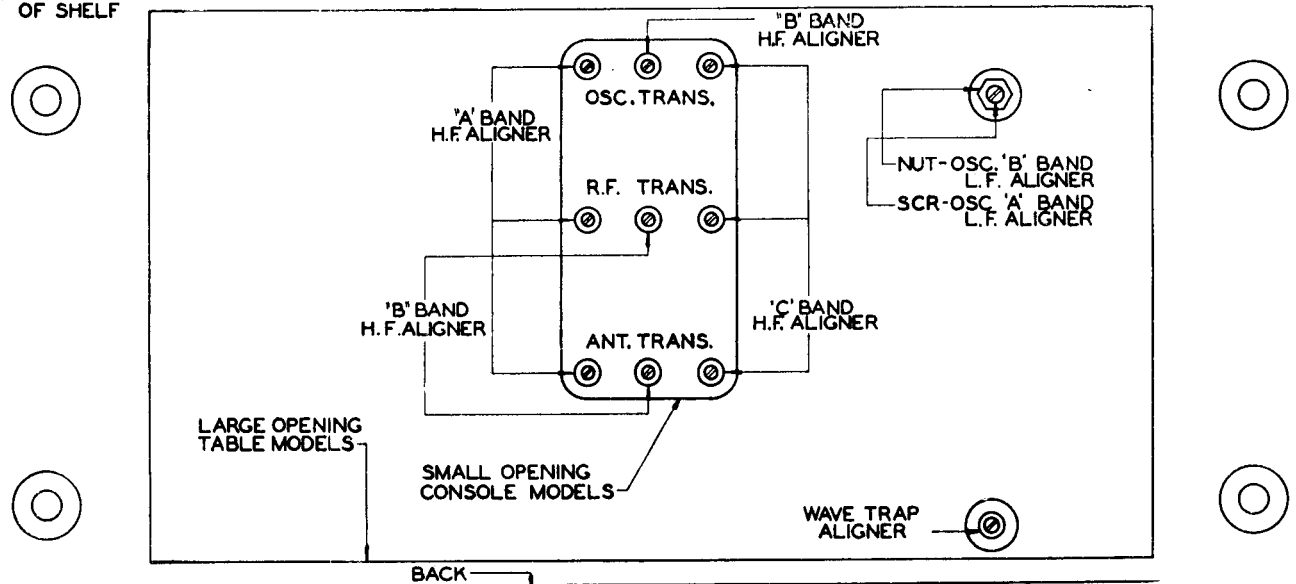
View Through Chassis Mounting Shelf Showing Adjusting Screws for R. F. Aligning Capacitors.
